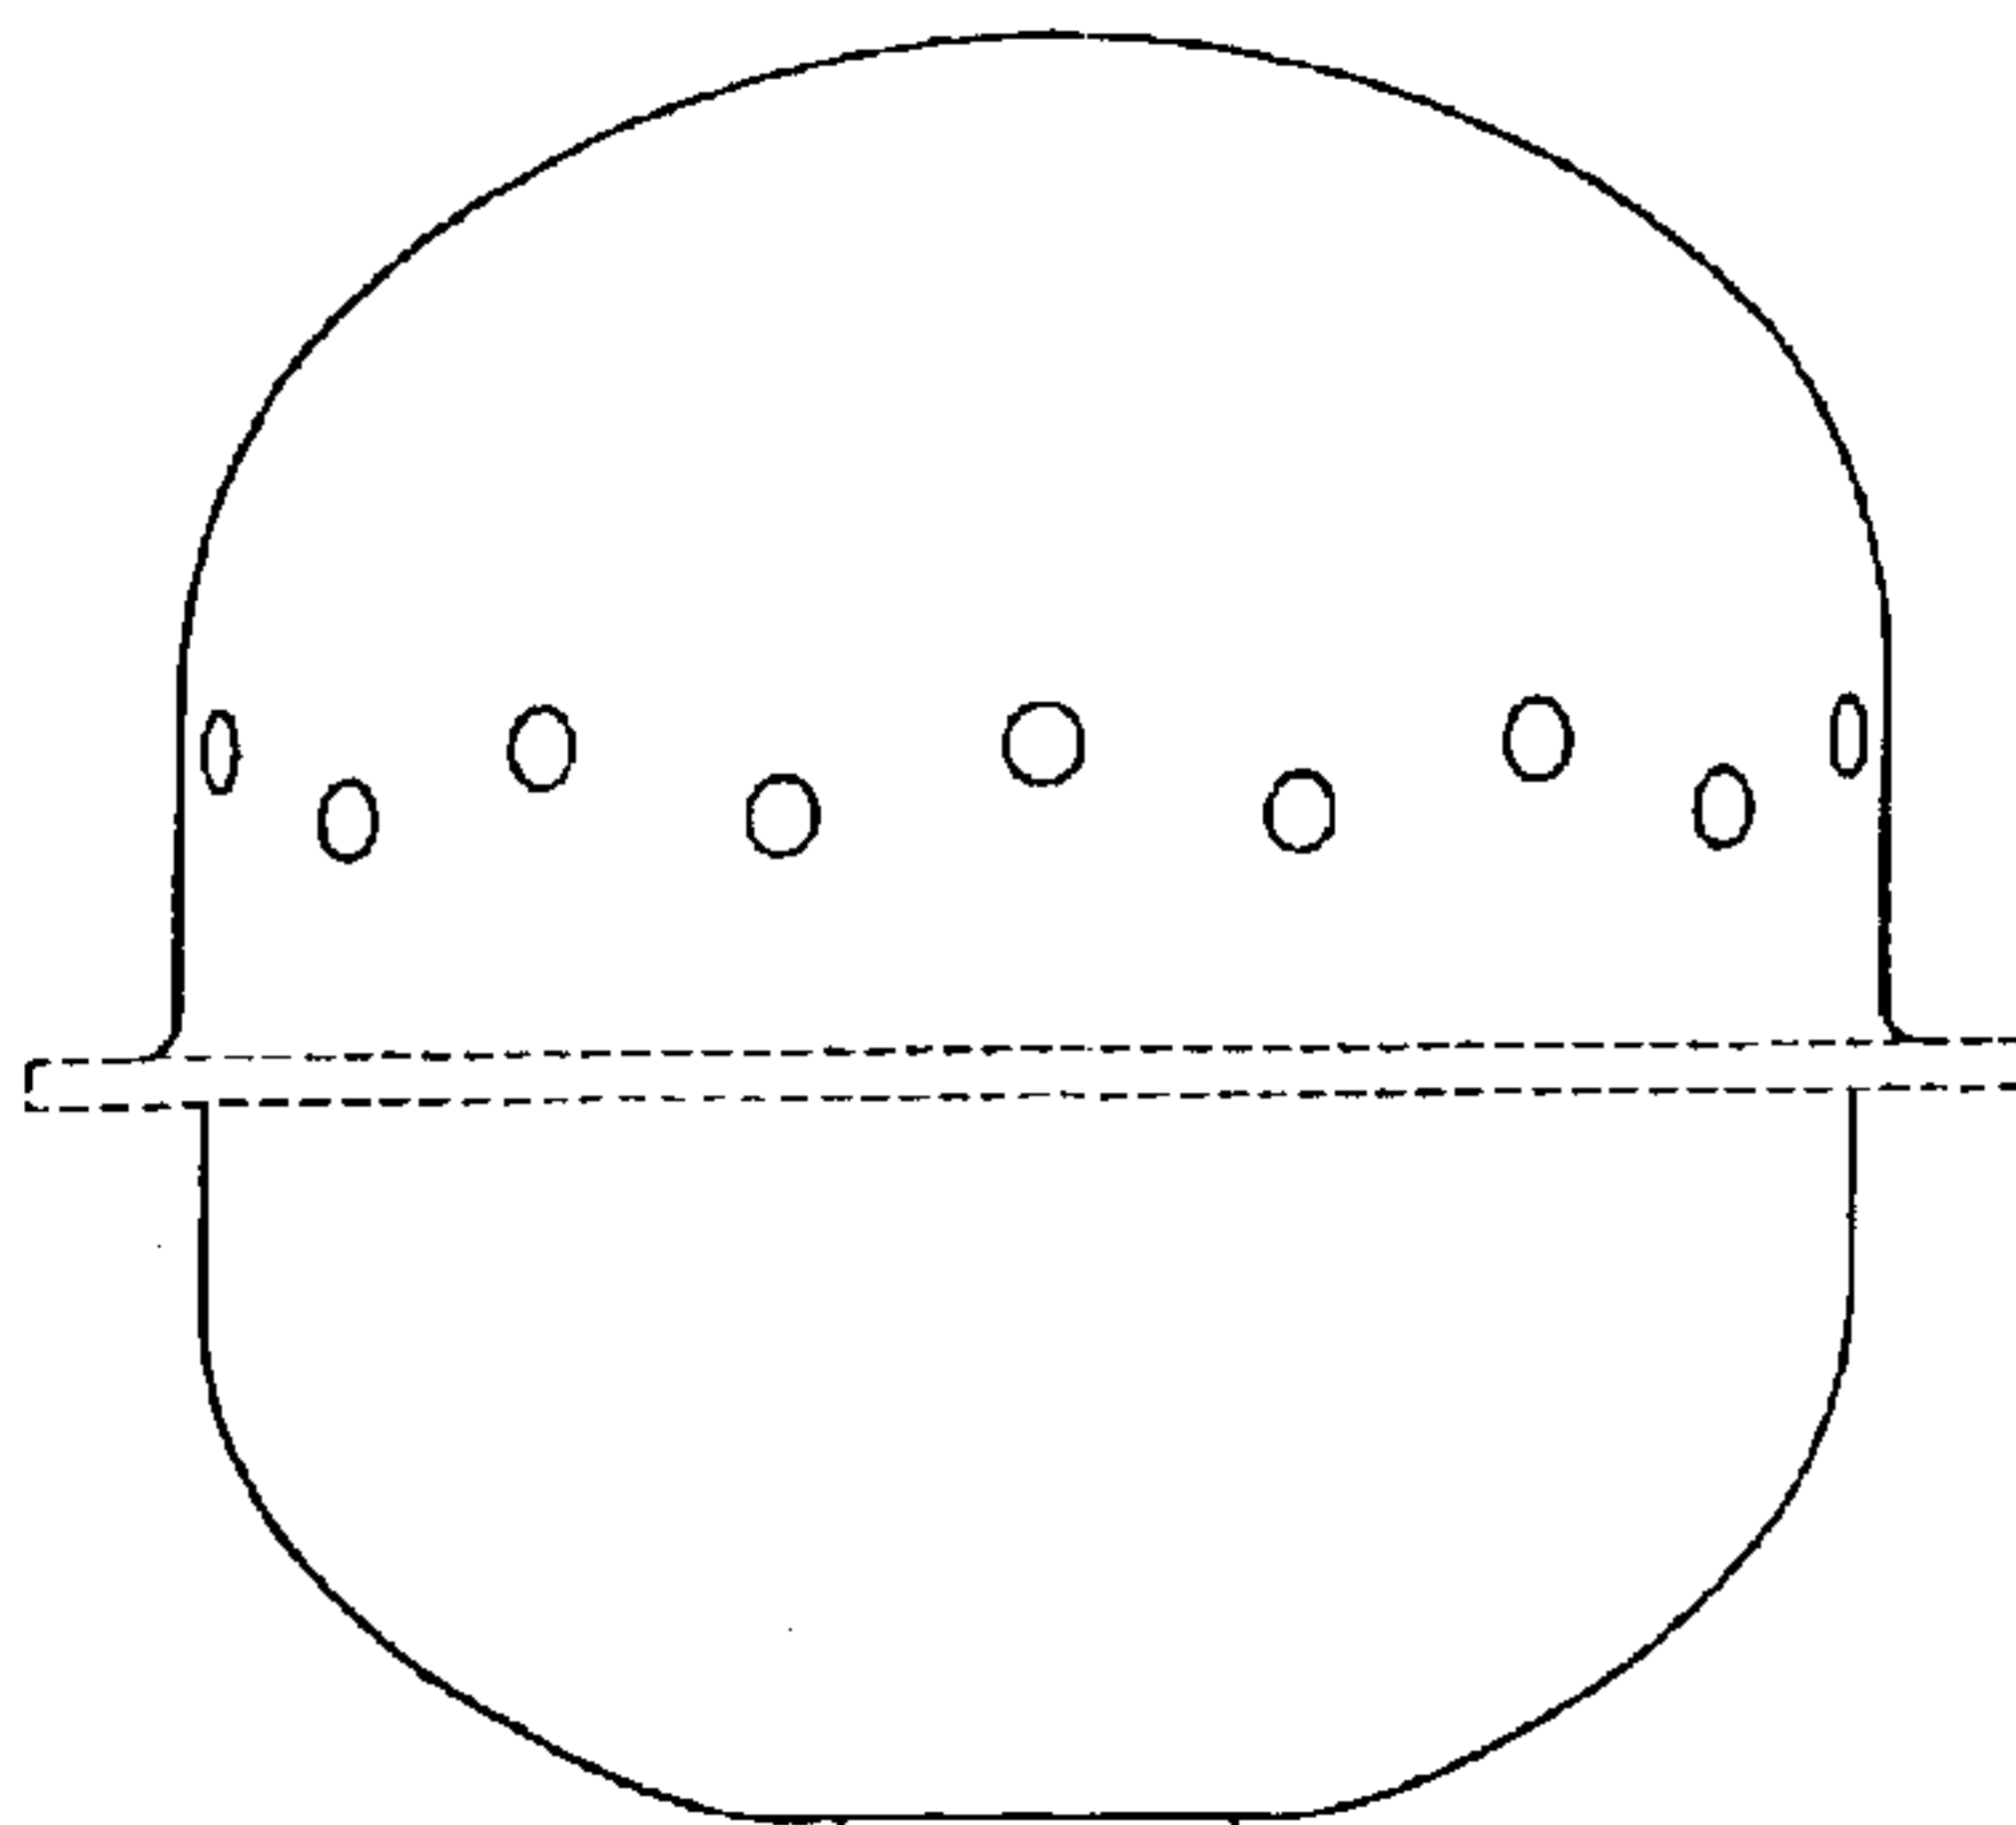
is a right side elevational view of FIG. 13, the left side elevational view being a mirror image of the side view shown;
